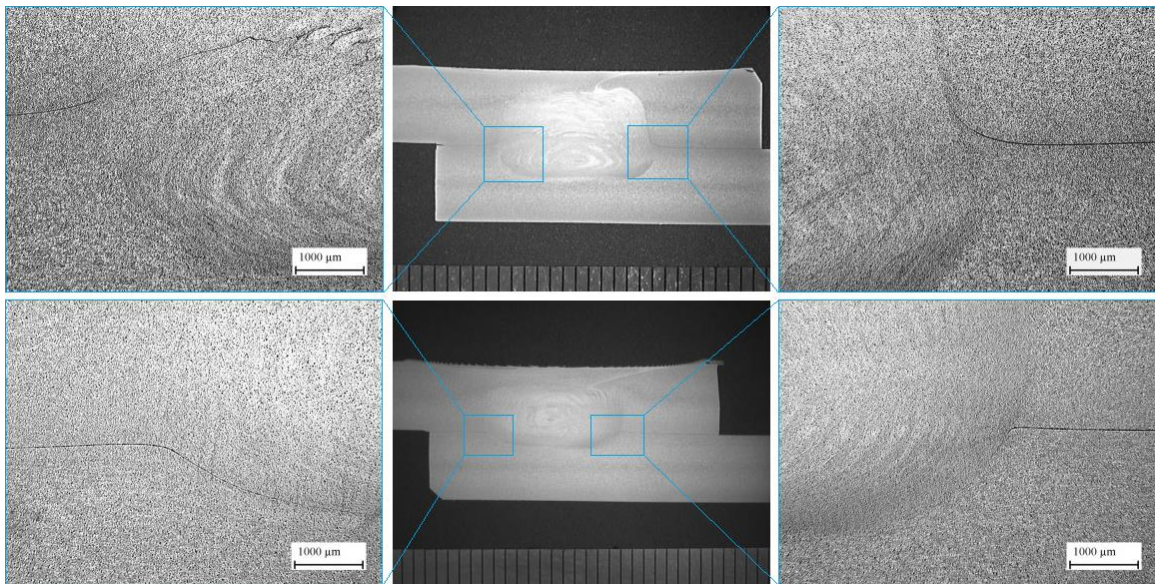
5083-O Lap Welds in 6 mm Thickness made with Flared-Triflute™ Probe (Top) and Skew-Stir™ Probe (Bottom); Retreating Side on Left, Advancing Side on Right; Image adapted from [35]
